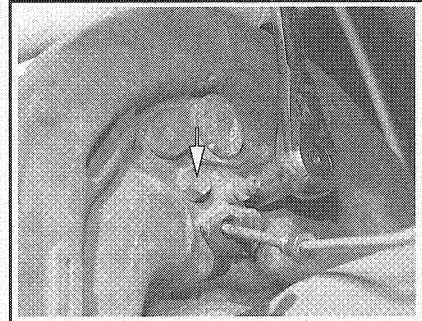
Remove the wheel cylinder retaining bolts and . . .
